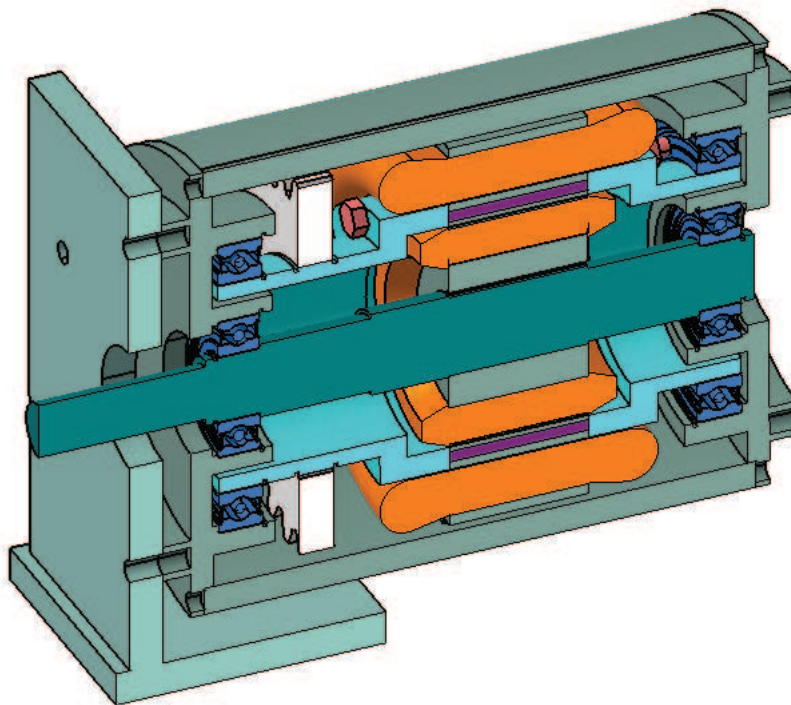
CAD drawing for outer PM rotor with both side bearings and gear mounted.
